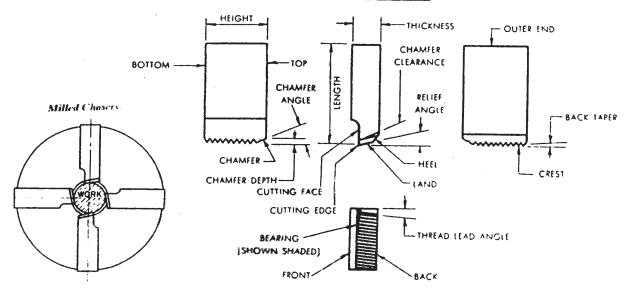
Die head chasers, blade type, milled (R H shown)
